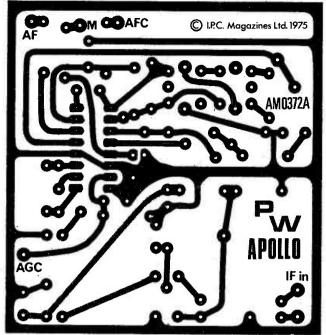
Printed circuit board master for the FM/IF Board shown full size.
